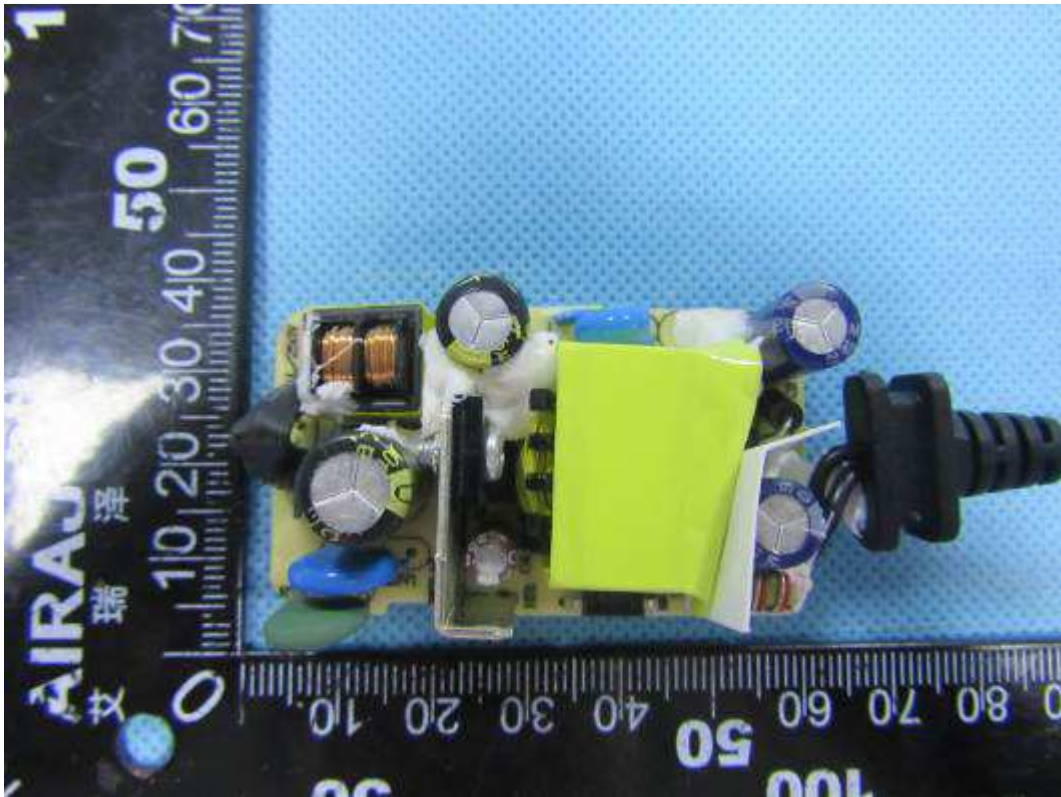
PCB bottom view of unit FJ-SW126Gxxxxyyyn with LF1
